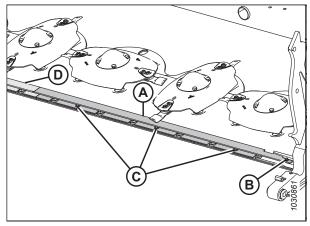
Right Deflector Plate Installed on Aft Edge of Cutterbar – View from Rear
